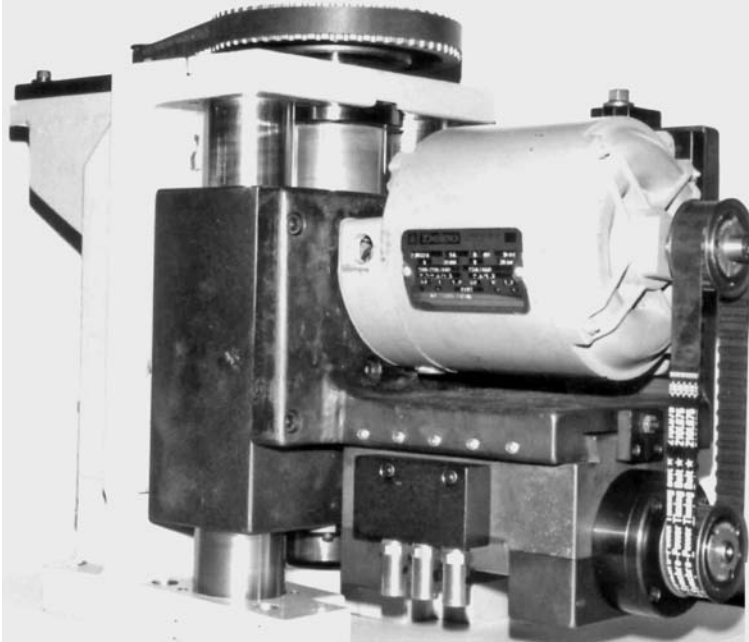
shows a traverse diamond roll unit with a small double-barrel stepper motor infeed and a dc motor cross-slide and DFW-HTG spindle. This carrier is designed for traverse dressing of CBN and engineered ceramic wheels.
